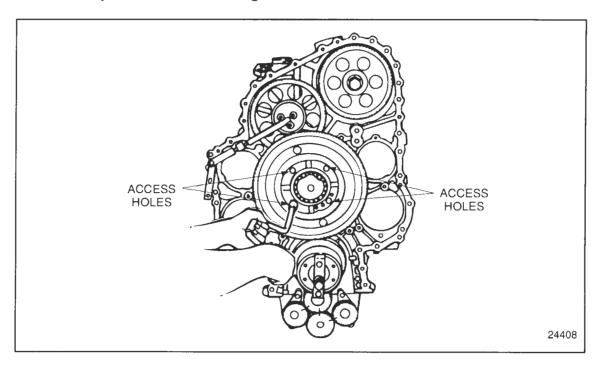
Removing Bull Gear Assembly Retaining Bolts
